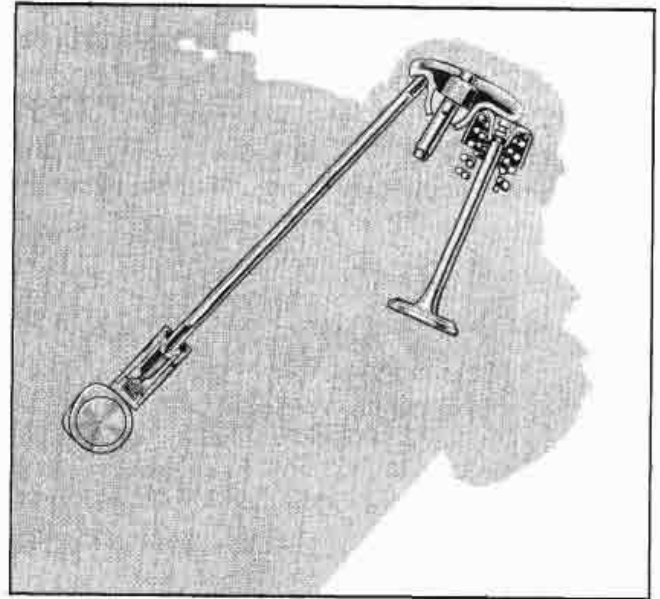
Fixed Setting Rocker Arm Valve Train
